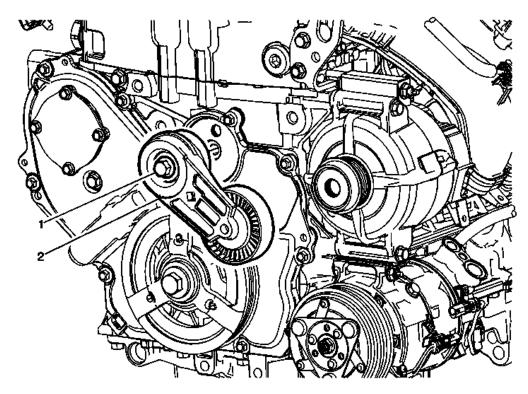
Drive Belt Routing Courtesy of GENERAL MOTORS COMPANY
